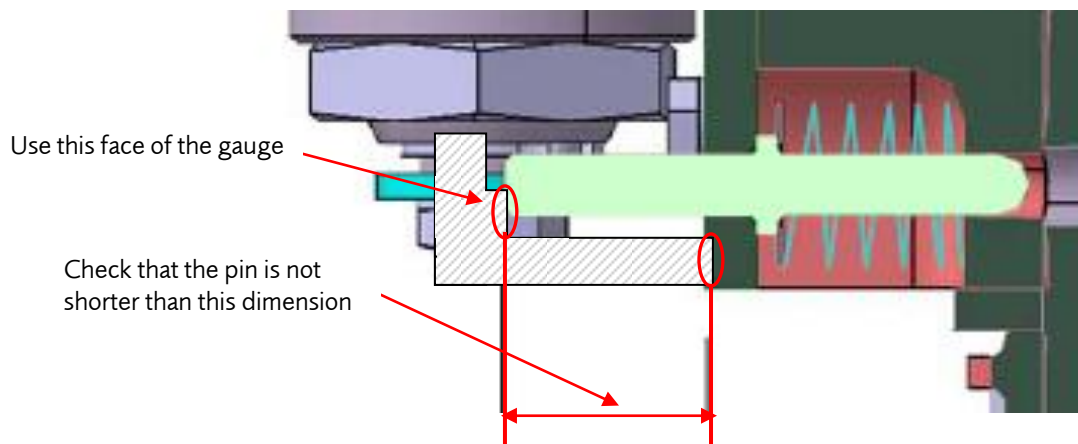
Minimum dimension for Extended locking Pin Gauge.
